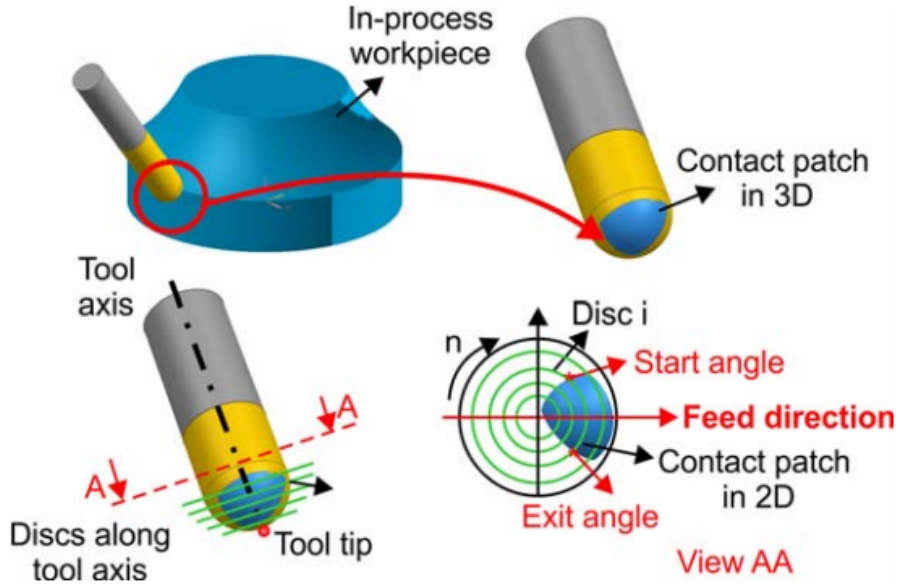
Cutter-workpiece engagement geometry extraction[8]
